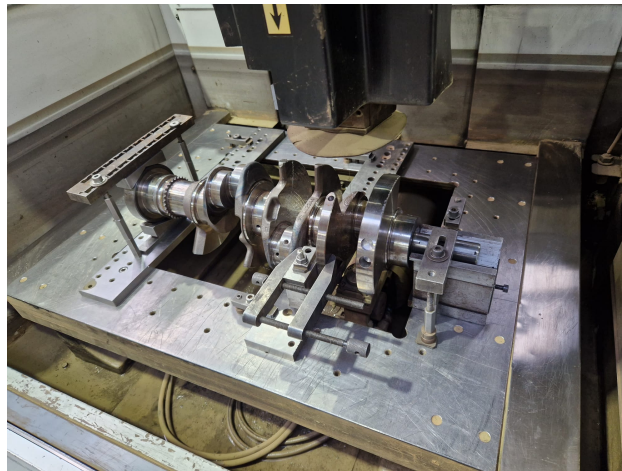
An industrial crankshaft fixtured to a wire EDM machine bed prior to sectioning
